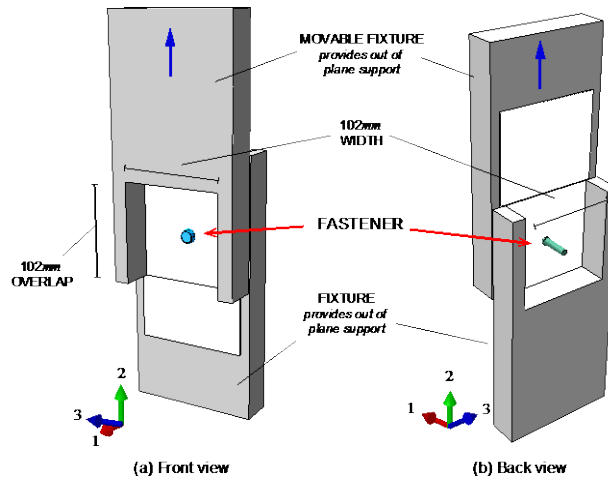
Test setup with sheet style boundary conditions where two machined aluminum parts (one bolted to the cross head, one bolted to the testing machine base) creates a 102 by 102 mm square testing area. This setup eliminates specimen curling caused by the moment in the single shear connection.
